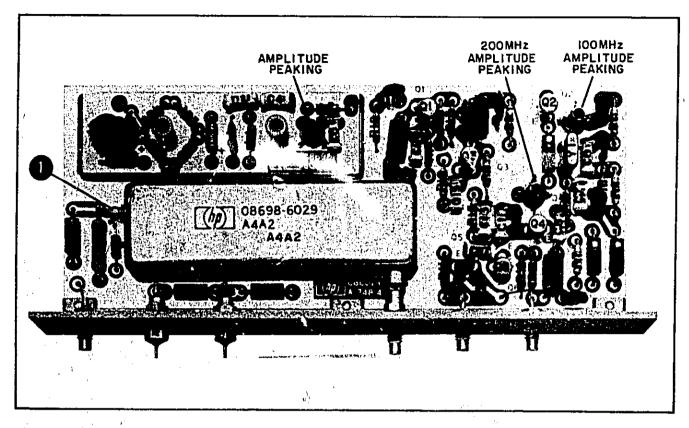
Component Identification, A4A1 Crystal Oscillator Assembly (Part of Change 10)
